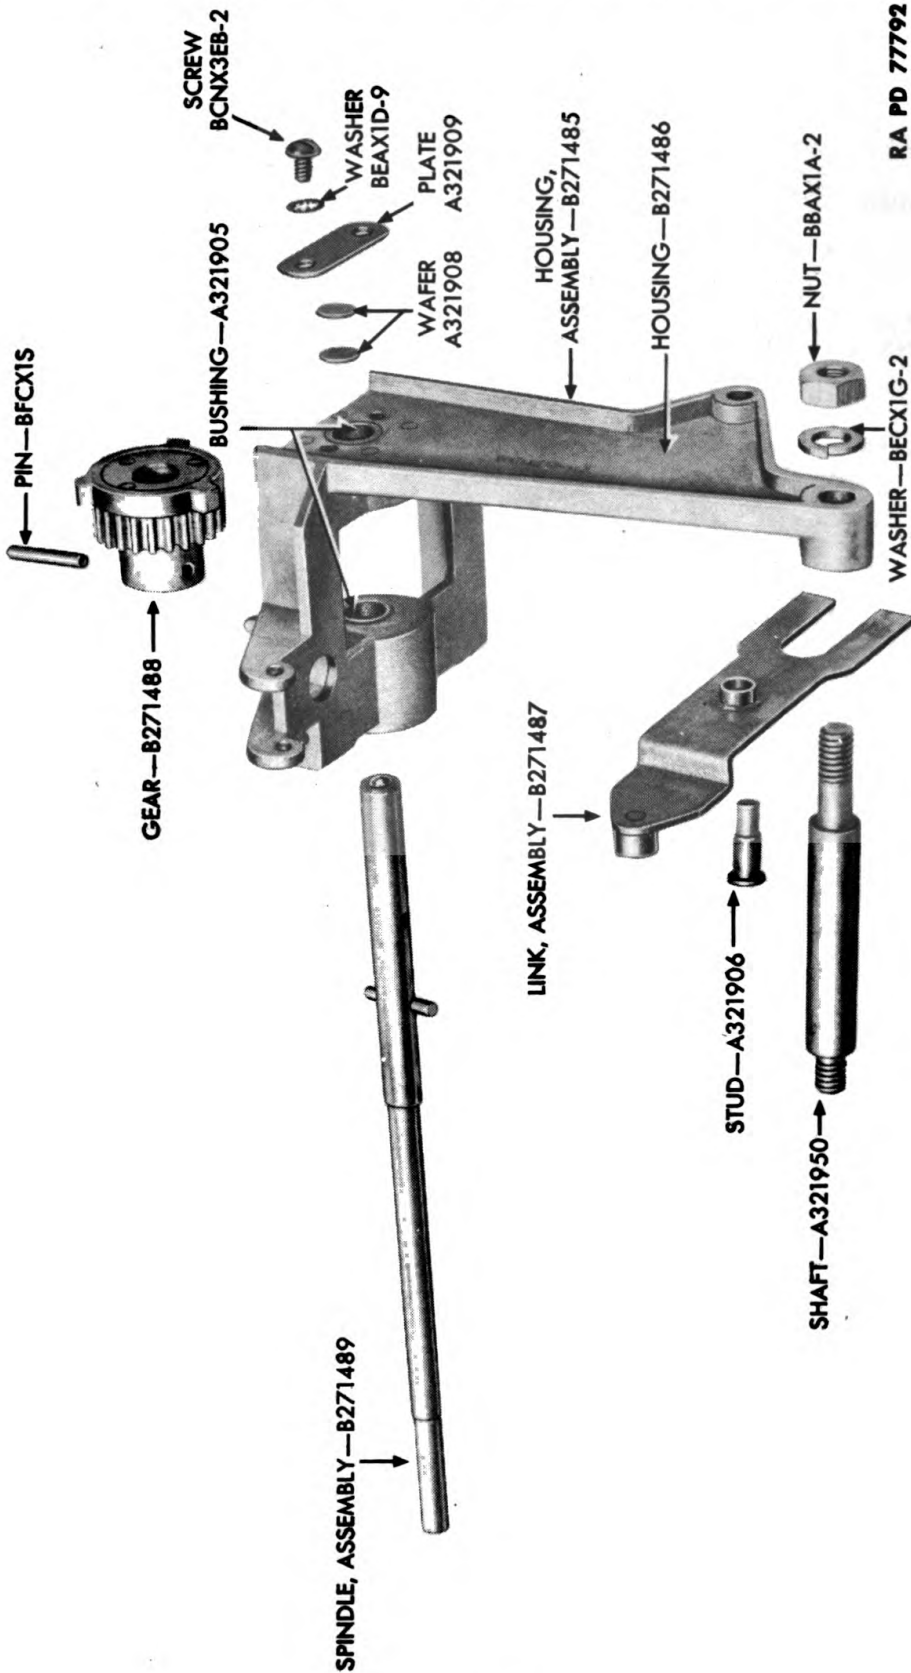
Gear Assembly, Link, and Housing With Spindle Assembly
